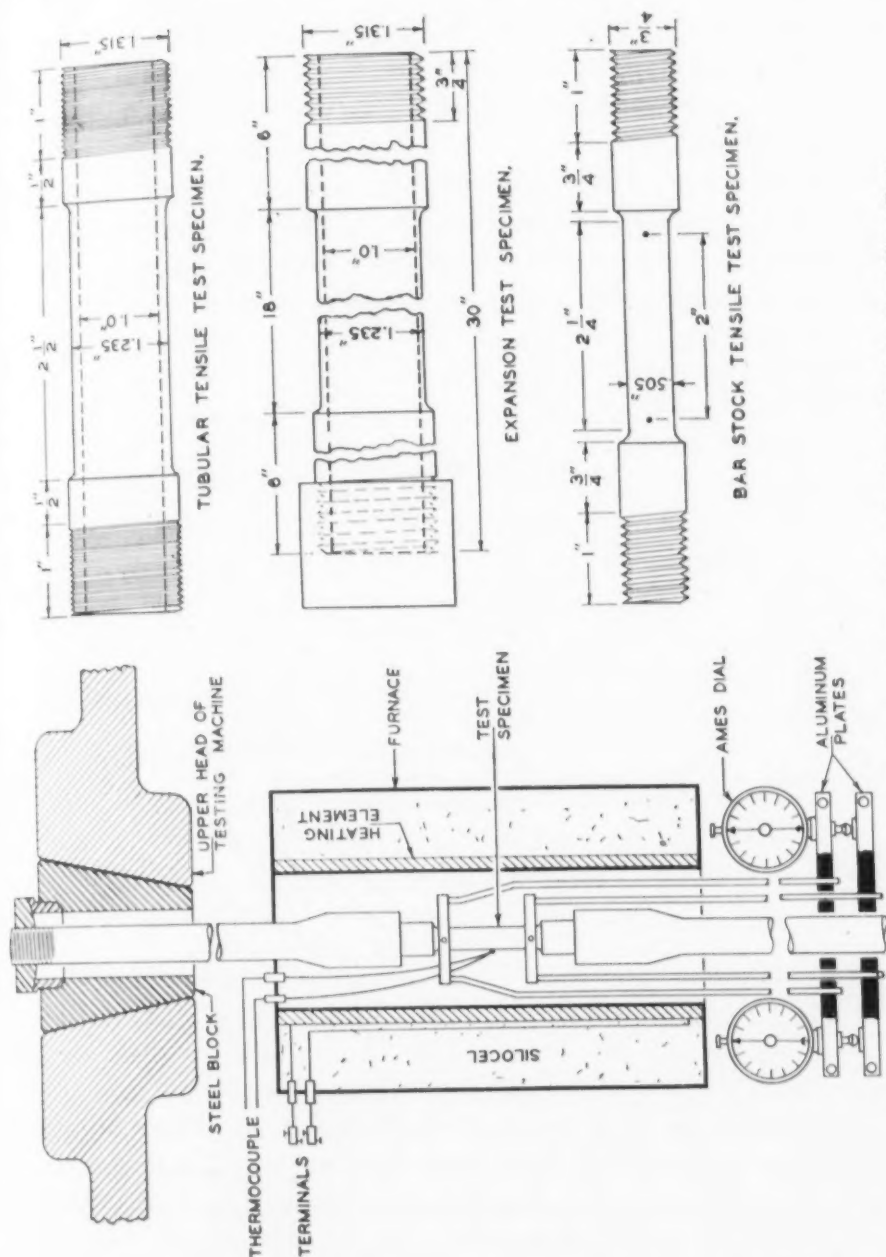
Diagram of the Testing Machine and Types of Test Specimens Used in Short-Time Tests.
